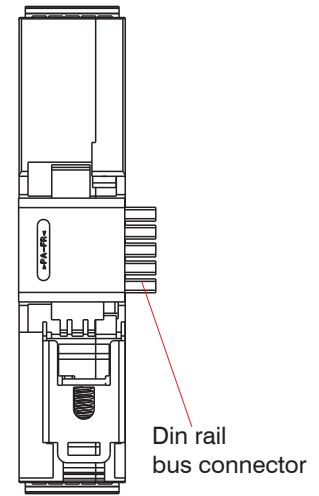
View rear side, MSC7602 inclusive DIN rail bus connector
